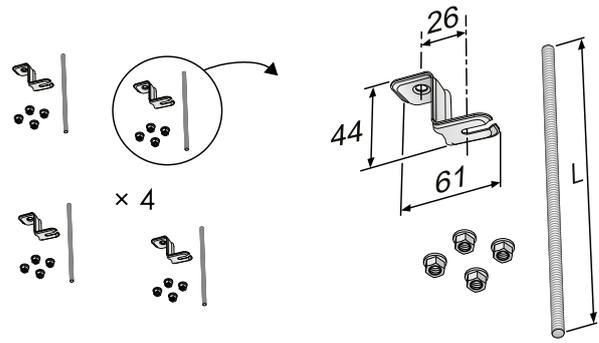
Assembly piece SYST MS M8-1, ceiling mount and threaded rod
